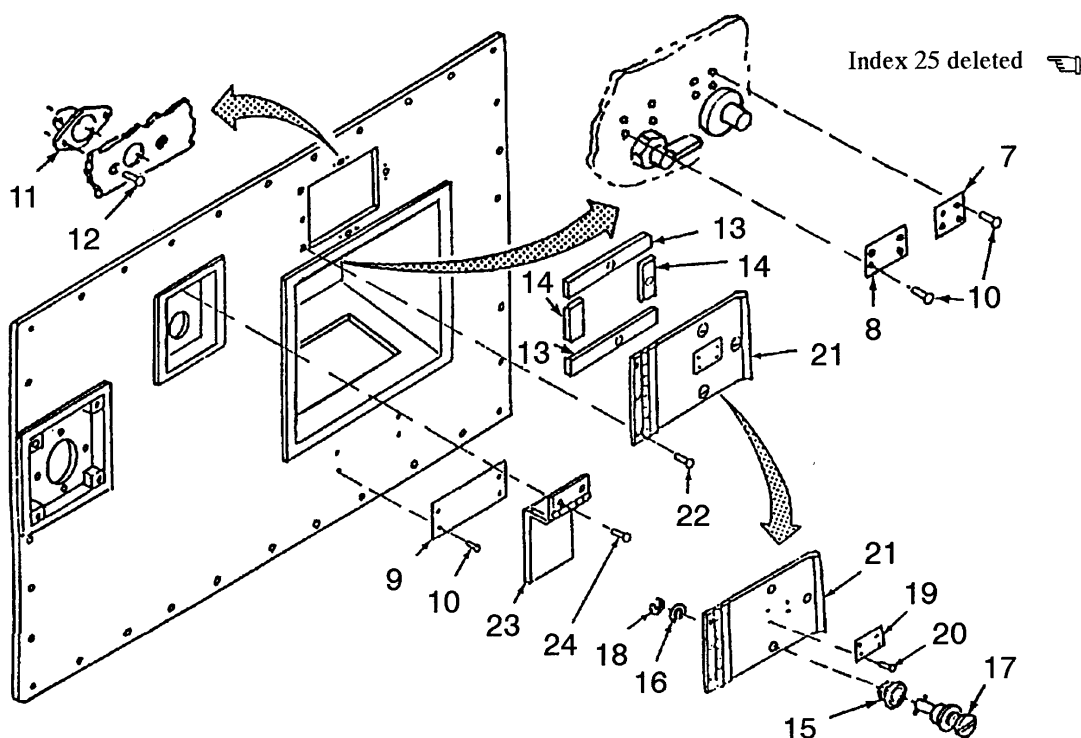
Rear Panel Assembly (Sheet 2 of 3)
